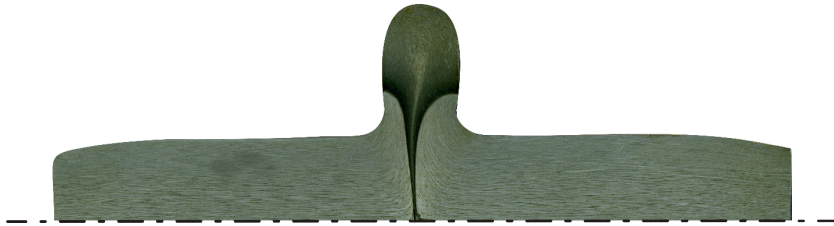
Cut of final workpiece (rotated by 90°)
